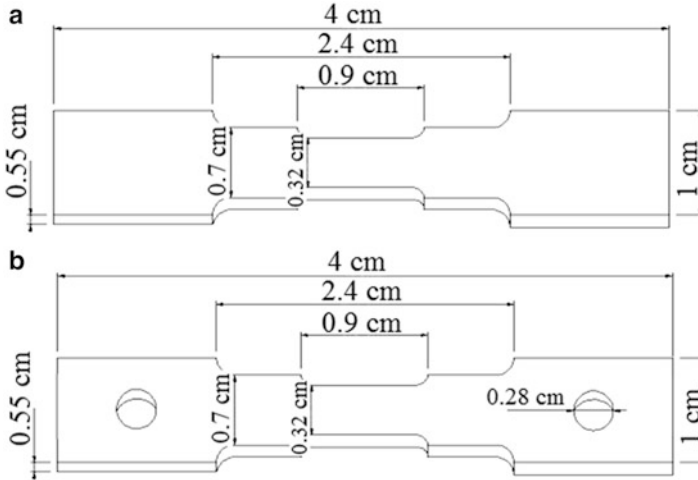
Tensile test samples manufactured by punching (a) For testing in a universal tensile machine and (b) For testing in a Kammrath & Weiss tensile module
